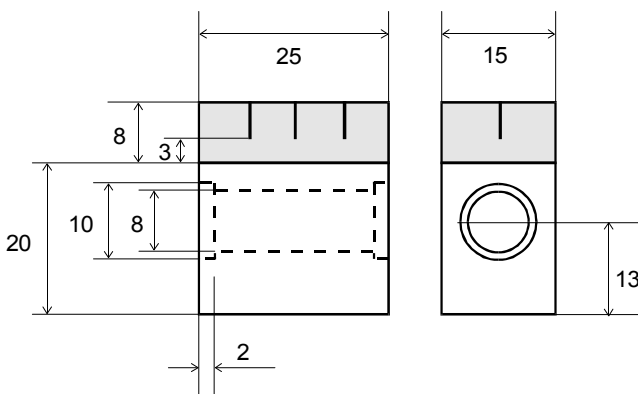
View and dimensions of the 8mm-thick Be flat tile mock-up
